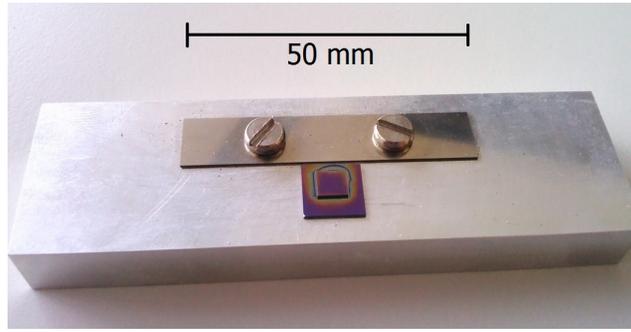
Die holder fabricated out of an Al block with stainless steel sheet section attached with two screws. Two SiO₂-SiO₂ bonded dies are positioned ready for die shear test.
